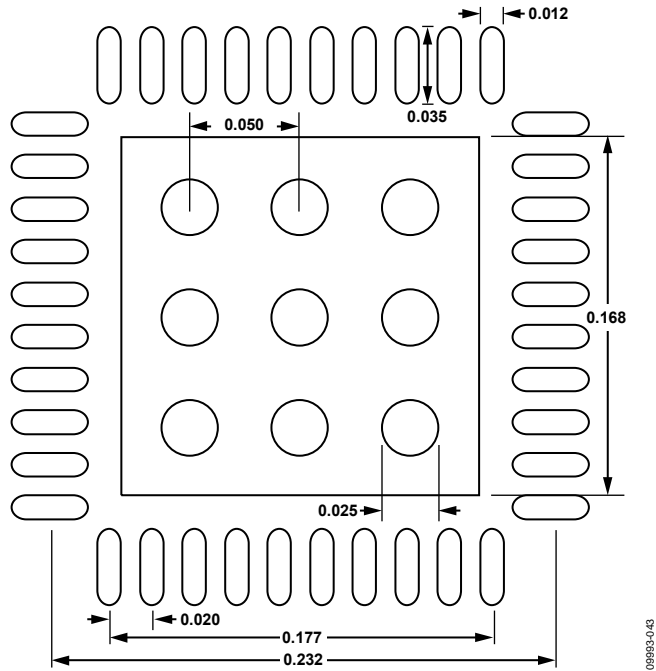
Evaluation Board Layout Dimensions for the [ADRF6807](#) Package
